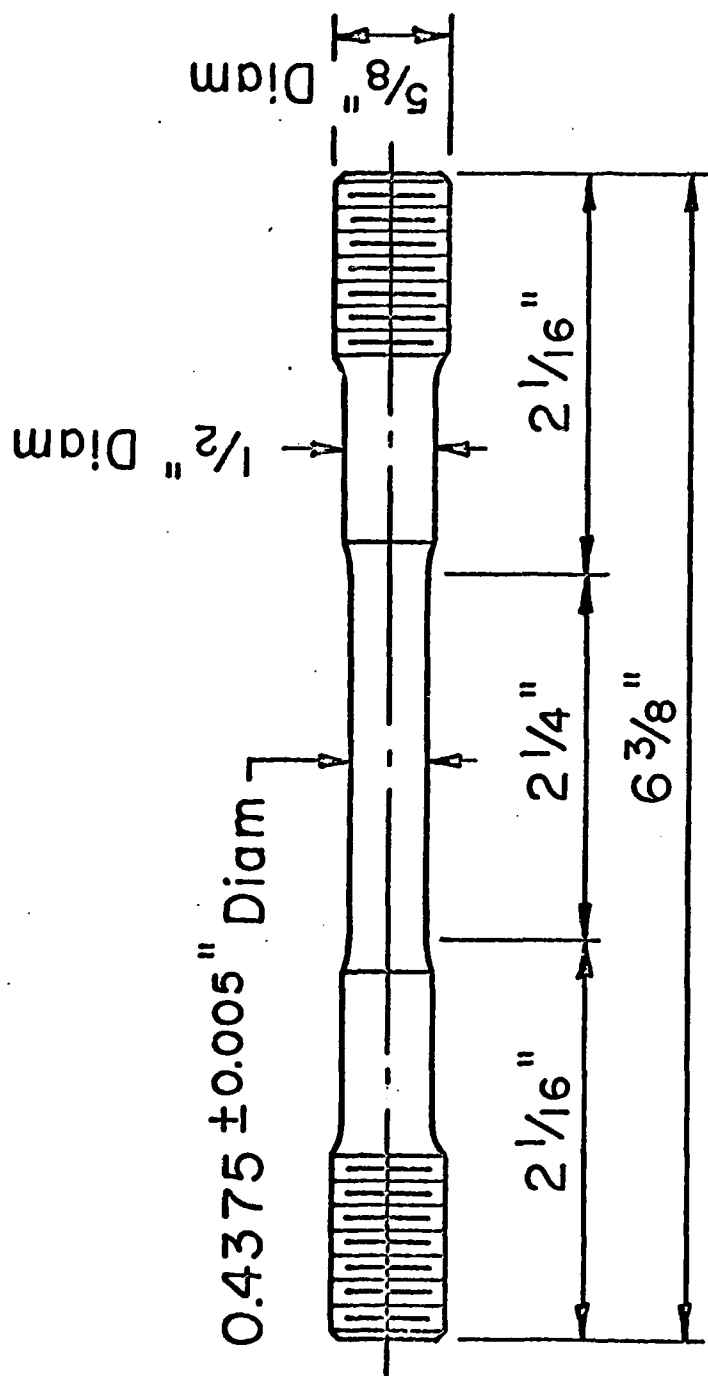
0.437-in. Diameter Tensile Specimen For Stress Corrosion Tests.
